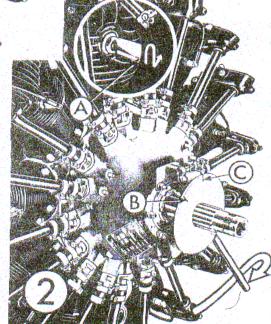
Finding Top Dead Center (Sheet 1 of 2 Sheets)
